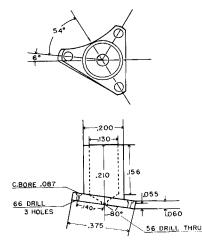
Brass pattern of epoxy resin mount with dimensions in inches.
